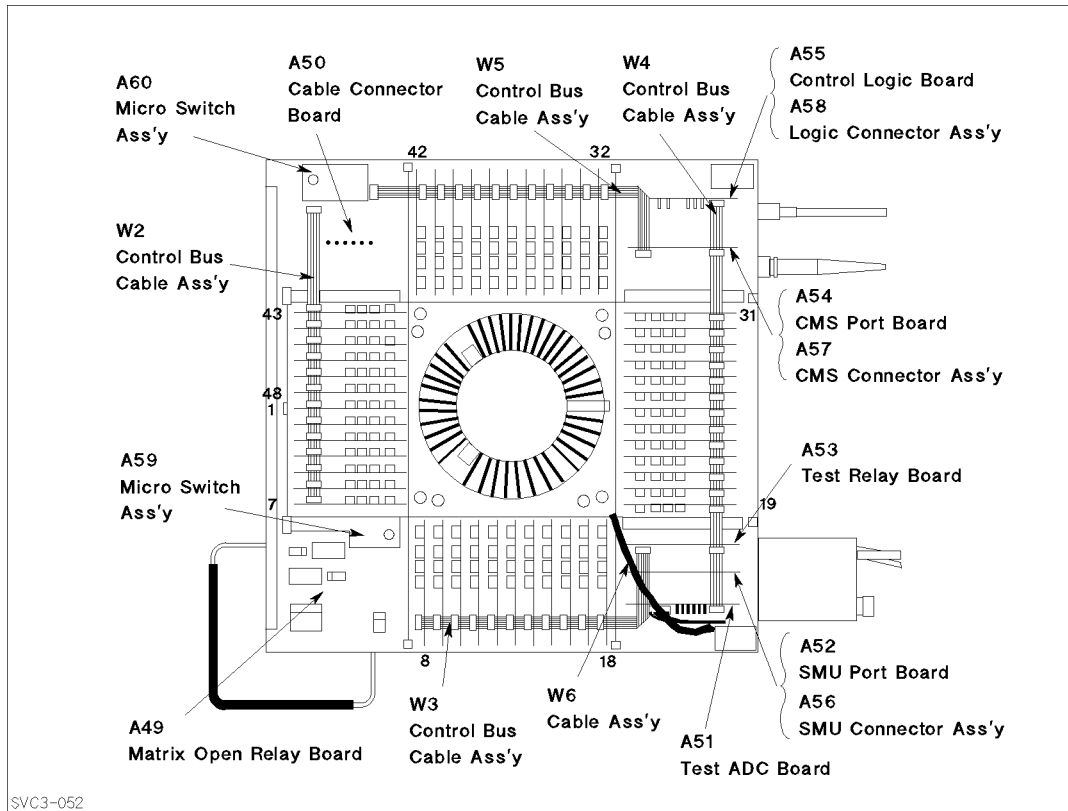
Assembly Locations in the HP 4085B 48-pin SWM
